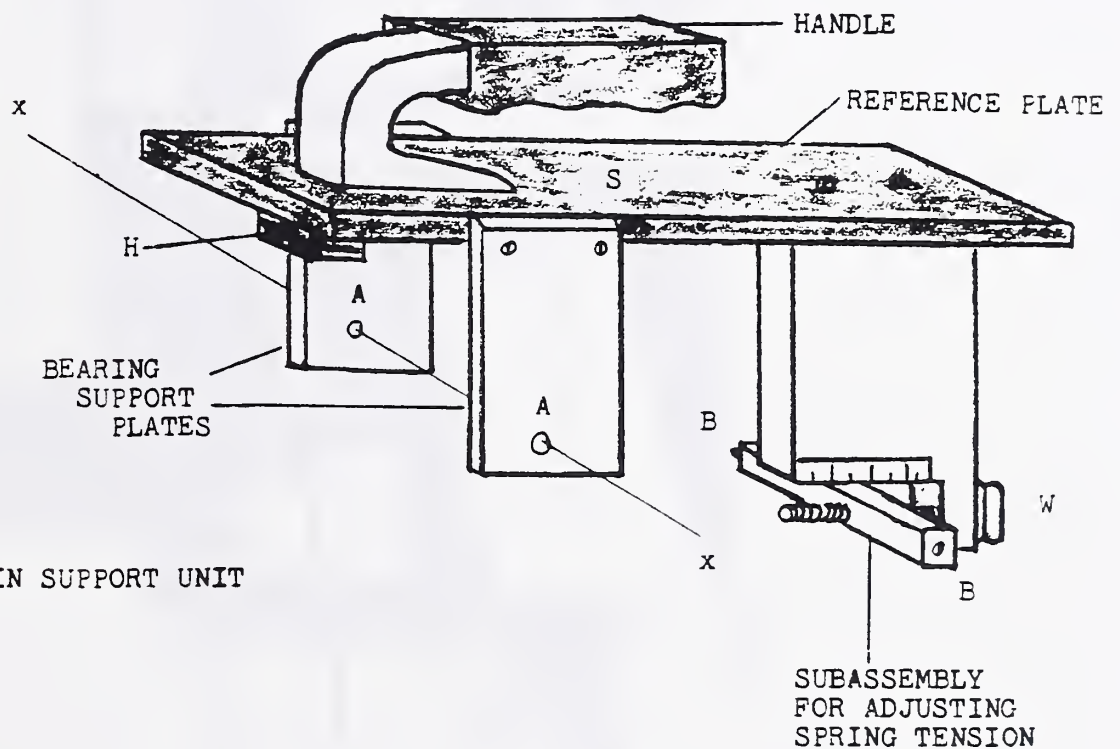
SCHEMATIC ILLUSTRATION OF INSPECTION DEVICE
